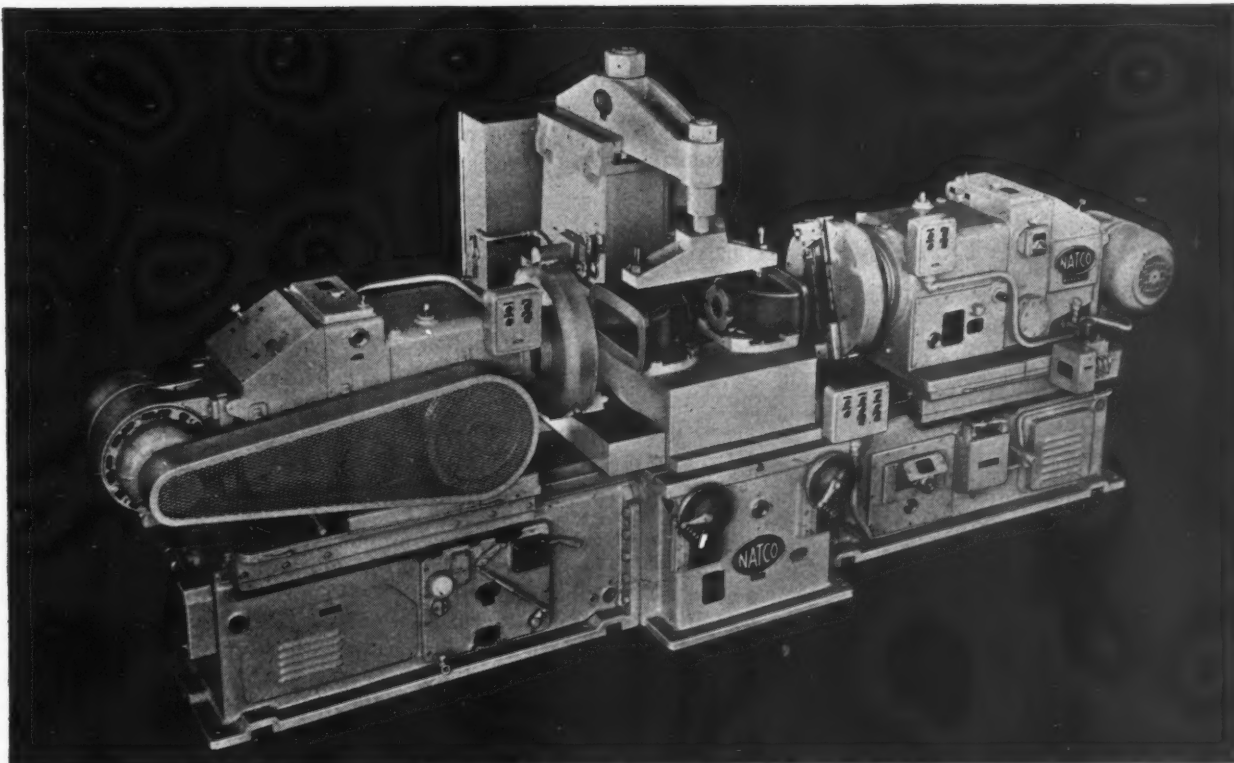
Natco "Borface" Machine Equipped for Facing Two Valve Bonnets Simultaneously
